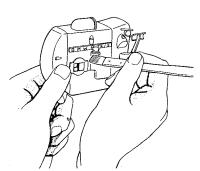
Construction of Carburettor Each Right Carburettor and Left one has three Vinyl Cords. Check the part number of Carburettor.
